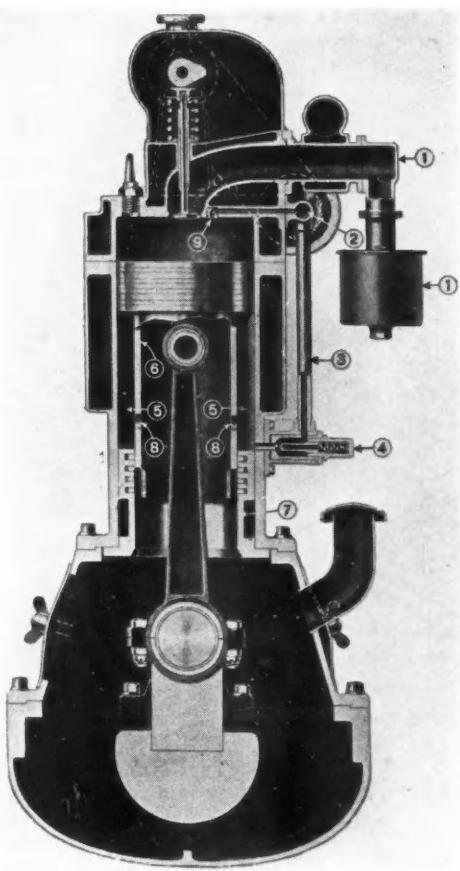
This sectional drawing illustrates the general arrangement of parts in a Schwarz-Cycle engine
